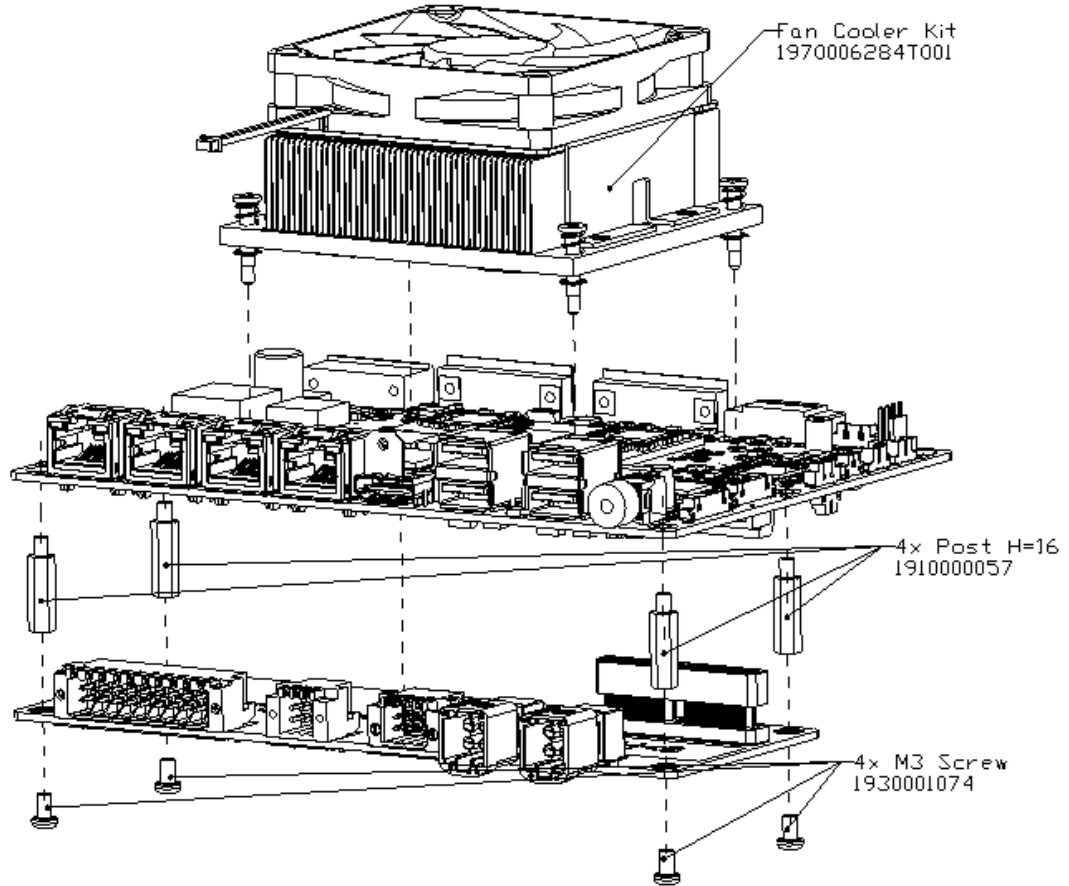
ASR-A503 assembled with cooler and AFE-RM06
